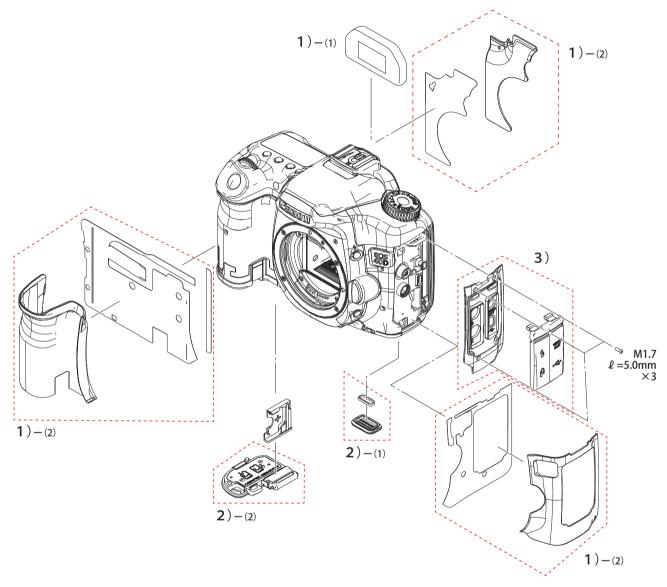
External Rubber, Battery Cover Ass'y, and Interface Cover Removal
